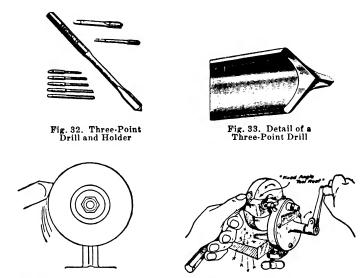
Left, Proper Method of Holding Drill When Sharpening; Right, Sharpening Three-Point Drill on Hand Grinder Courtesy of The Rawl Plug Company, Inc., New York City
